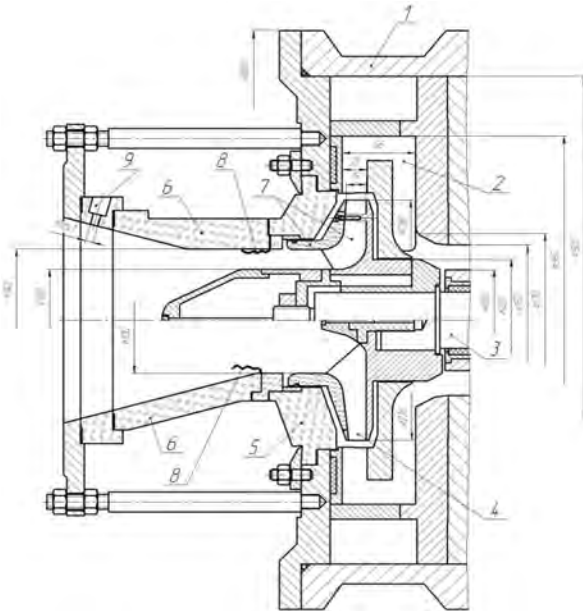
Test Configurations #1 (Above Axis) and #2 (Below Axis) (Dimensions in mm): 1 - Pump Housing; 2 - Vaned Diffuser; 3 - Shaft; 4 - Impeller #2; 5 - Transparent Cover; 6 - Reducer; 7 - Impeller #1; 8 - Flexible Fiber; 9 - Hole for the Pressure Pulsation Sensor.
